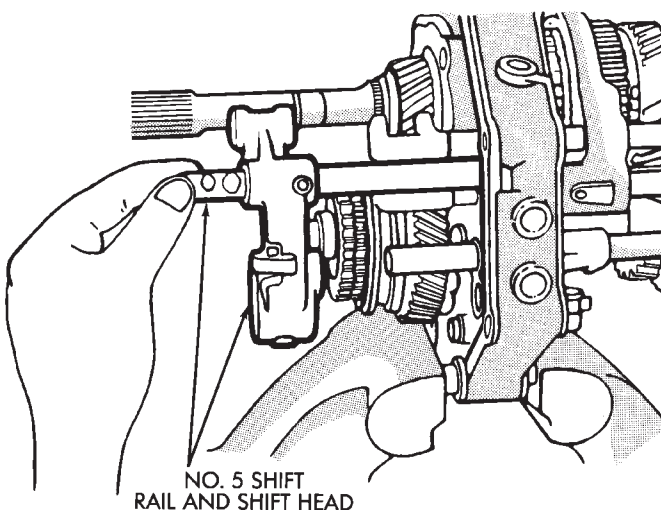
Removing No. 5 Shift Rail And Shift Head
